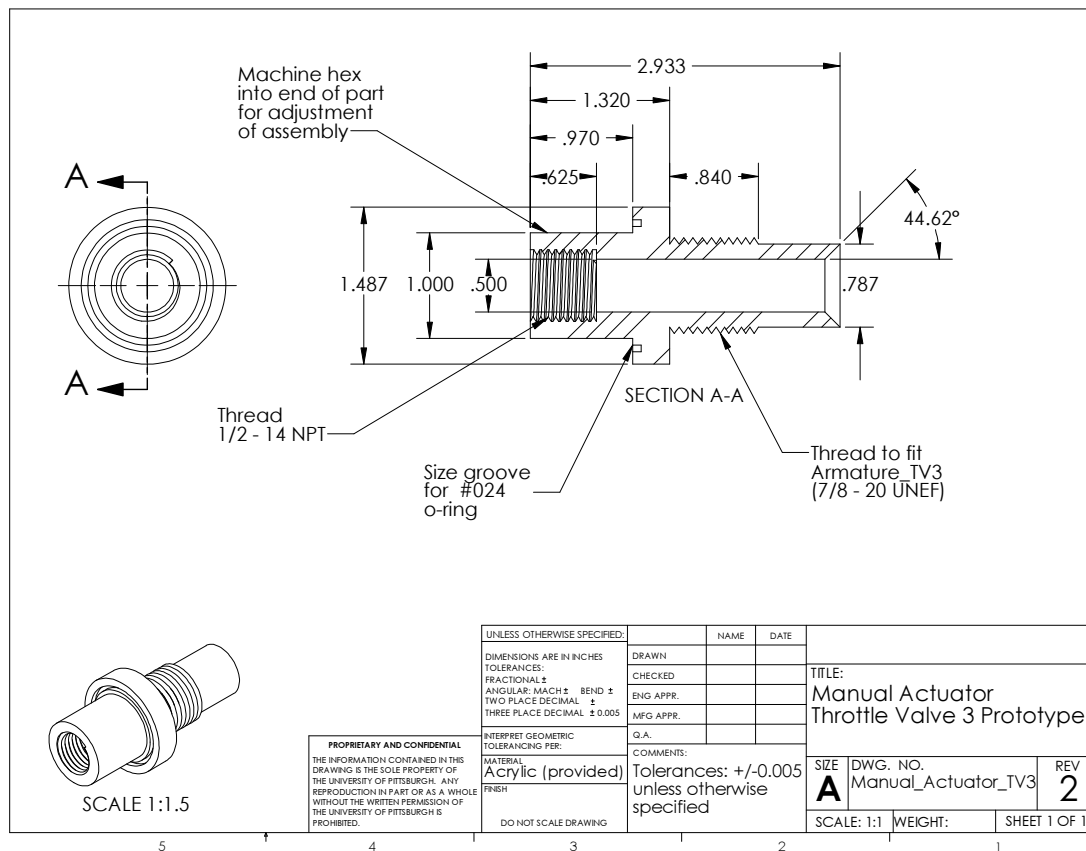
Manual actuator component drawing for split-flow plug valve prototype (TV3).
